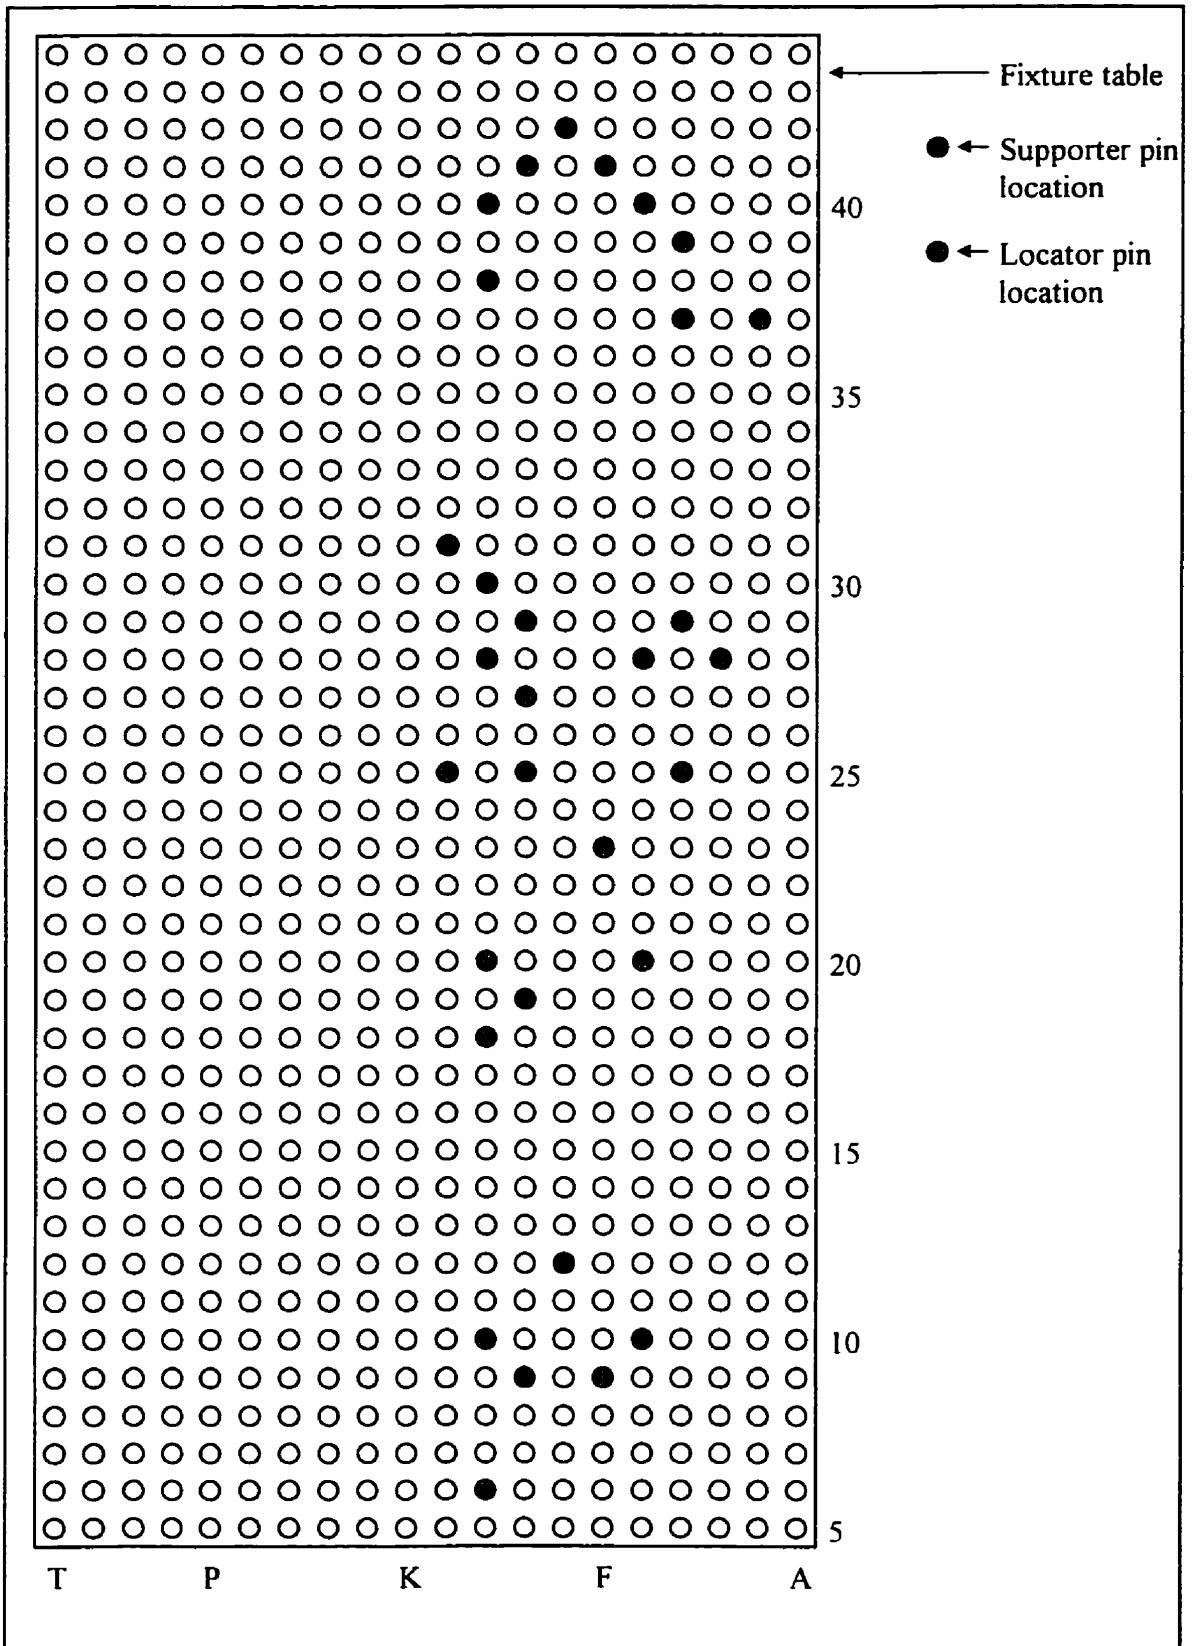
(h): Supporter and locator pin locations on the fixture table
